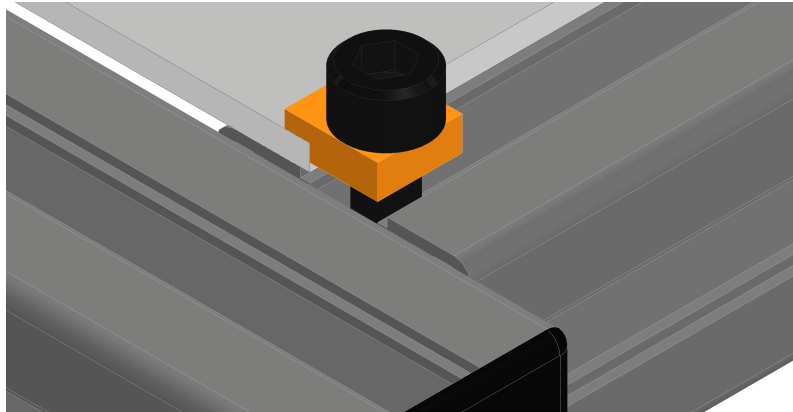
Zoom view of the plate holder. Adapted from [23].
